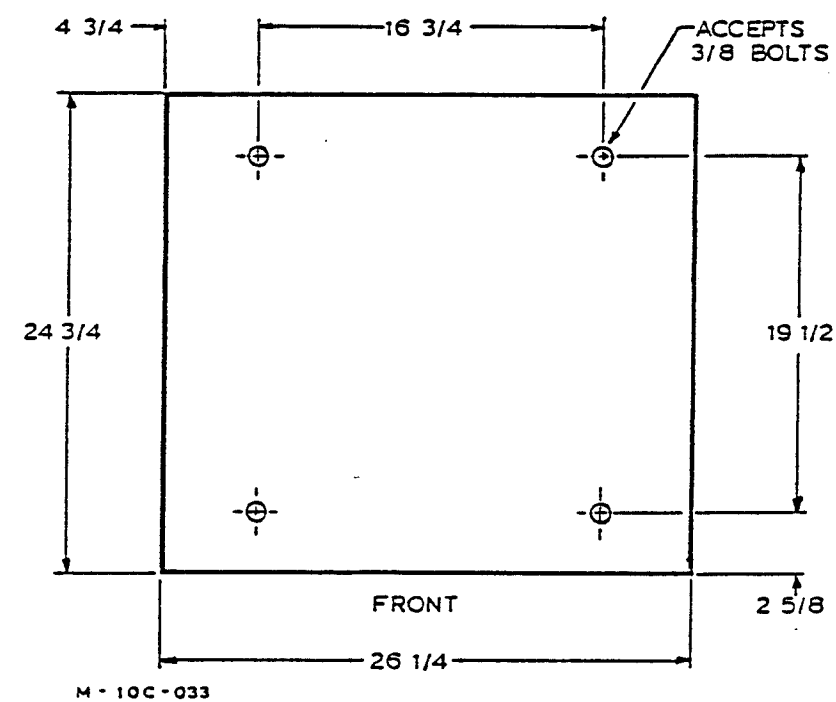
Assembly Detail - 5000 Watt Choke Assembly, Top View
